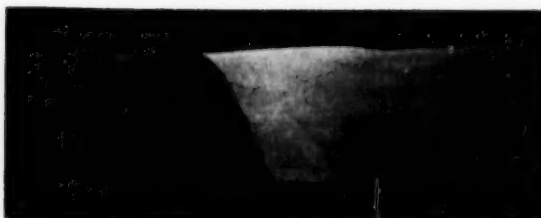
SECTION THROUGH FIRST WELD PROBE REMOVED FROM TWIN BRANCH UNIT NO. 5 TEST VESSEL AFTER 158 CYCLES
